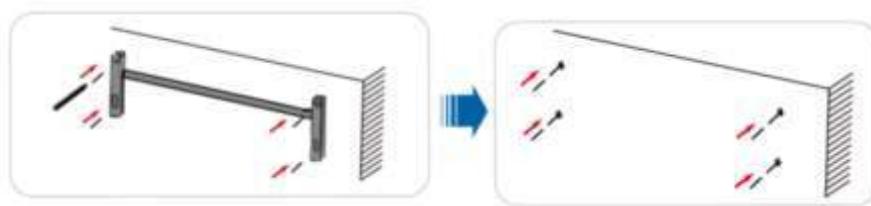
Level the assembled mounting-bracket and mark the positions for drilling holes
